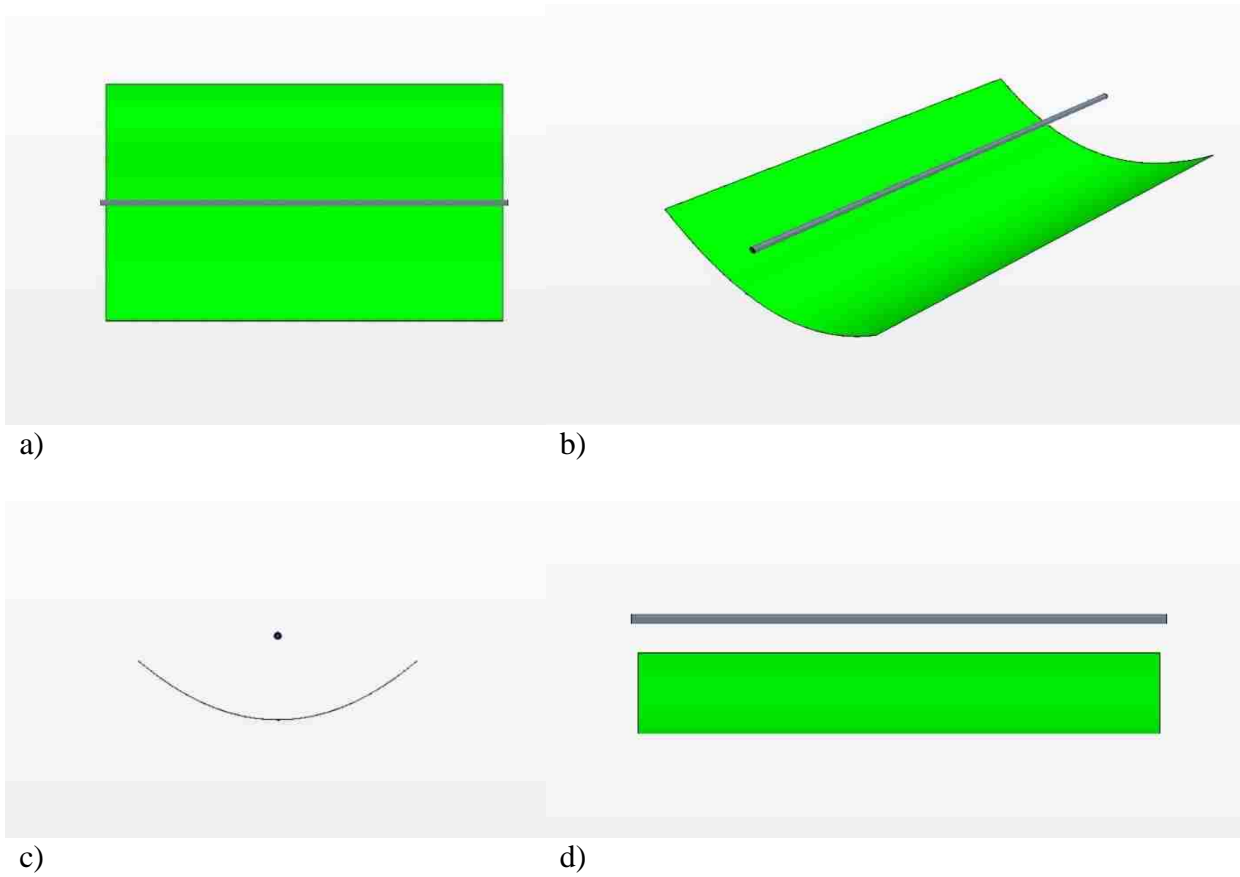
Geometry of LS-2 collector a) top view b) Isometric view c) front view d) side view
